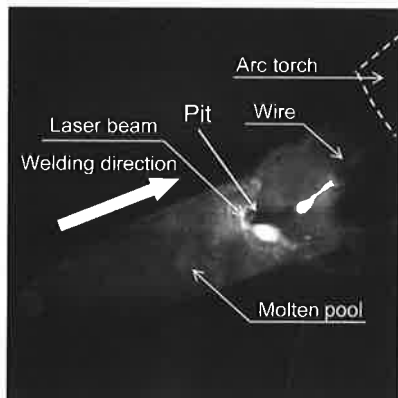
Typical frame of weld pool surface during hybrid welding in arc-leading by high speed camera
